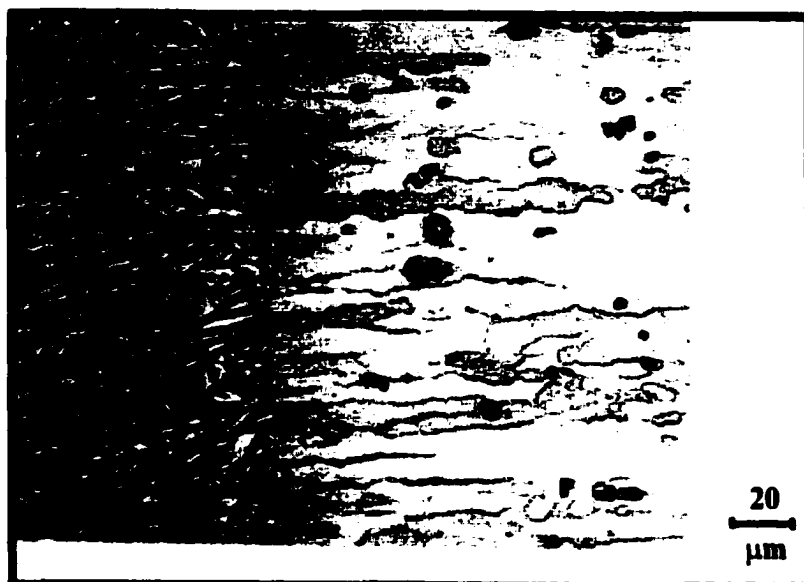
Microstructure showing equiaxed grain structure along the weld center of 6061 laser weld [93].
